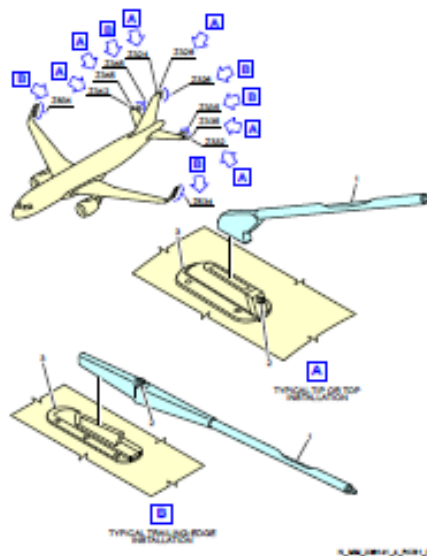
J (SHEET 1) - Static Discharger - Location and Detail
